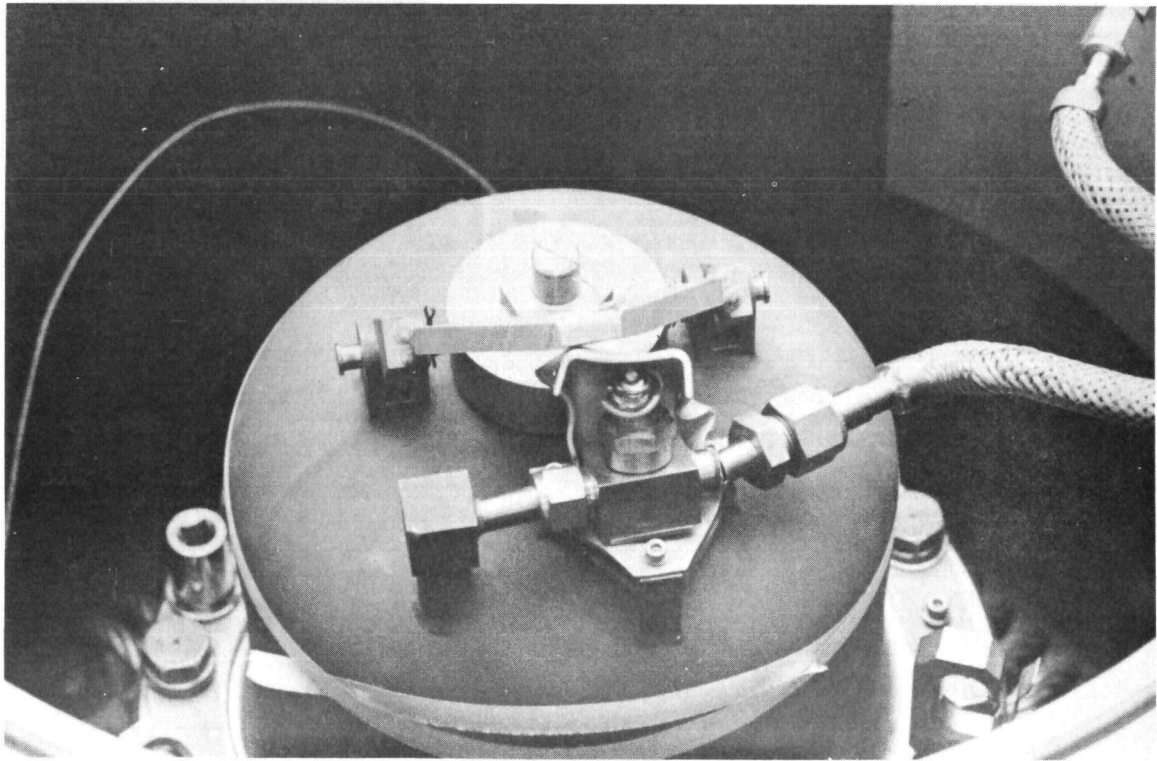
The SPC valve stem was broken and the valve guard buckled.
